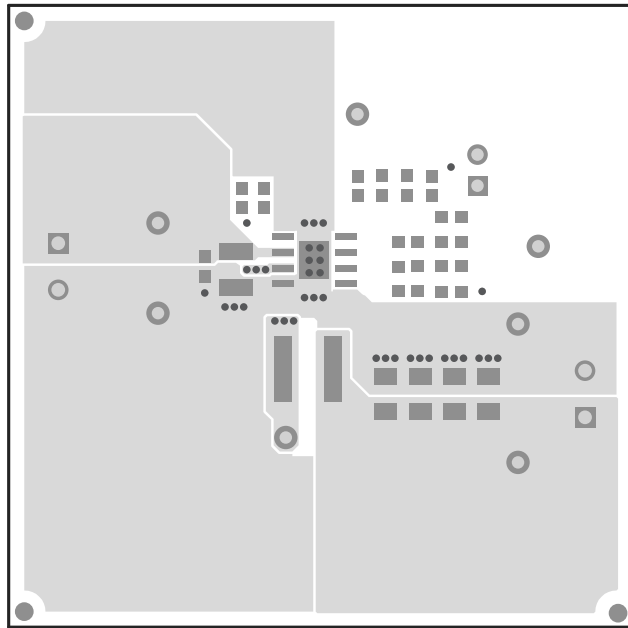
TPS54336EVM-556 Top-Side Layout 3
